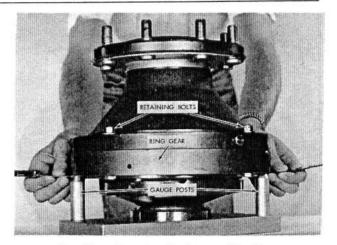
Measuring Gap between Ring Gear and Gauge Post — MFN267Y
